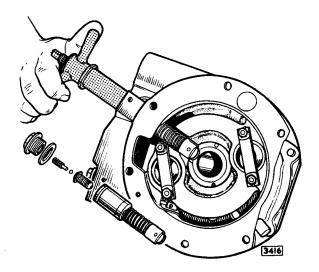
Removing the pump non-return valve. The valve components are shown exploded
